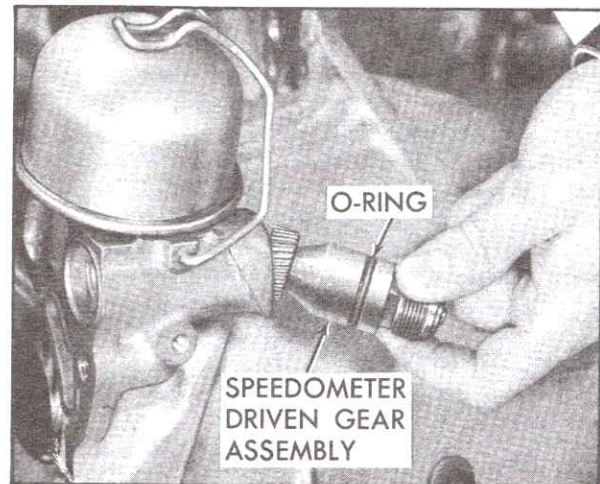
Installing Speedometer Driven Gear Assembly
